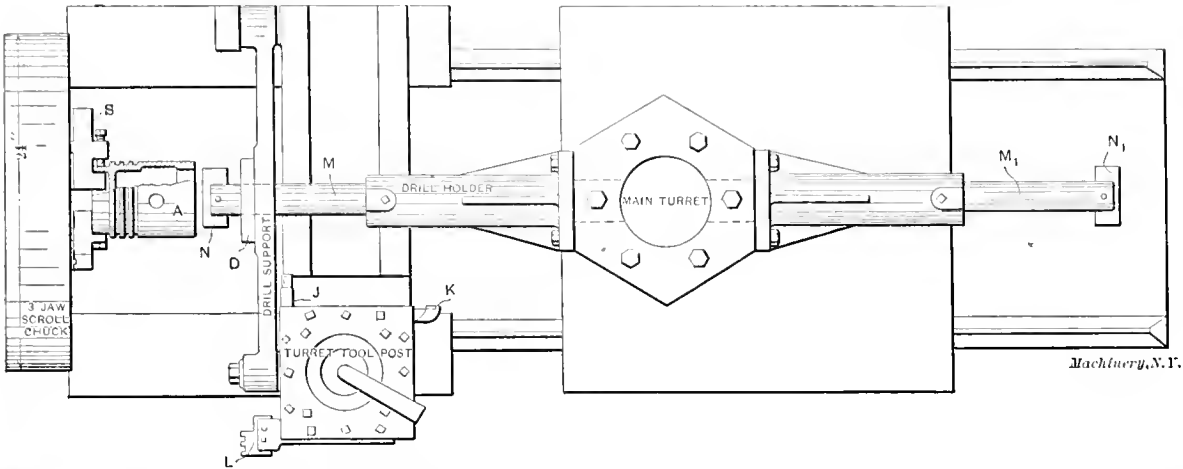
Method of Boring and Turning Pistons in Gisholt Lathe; note the Ring cast to the Work, by which it is held, and the Special Chuck Jaws used.
